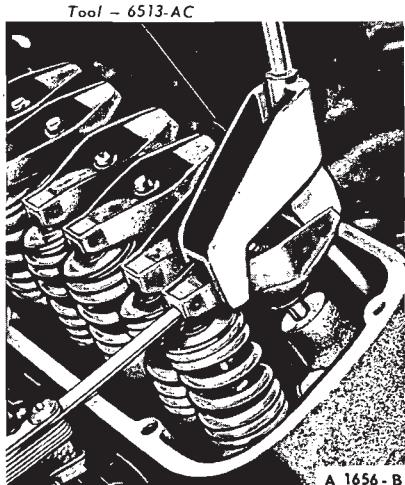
Checking Valve Clearance—Hydraulic Valve Lifters
